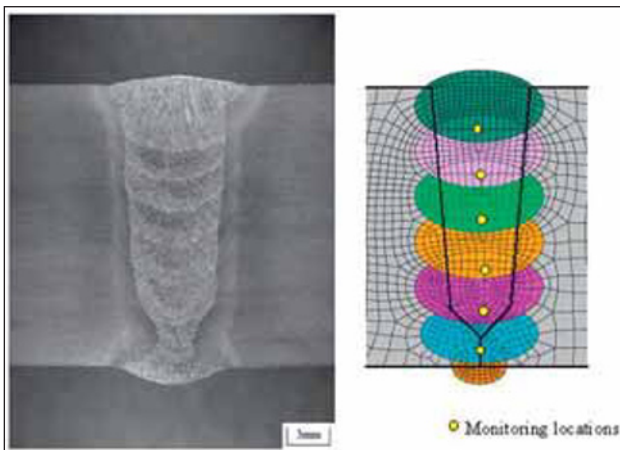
Macro of a narrow groove weld and the corresponding 2-D model
